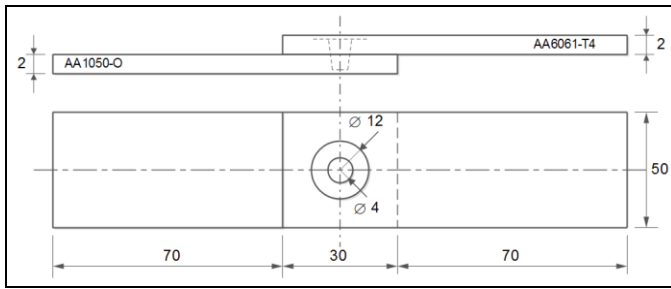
The AA1050-O/AA6061-T4 aluminum joints lap configuration (Dimensions in mm).
